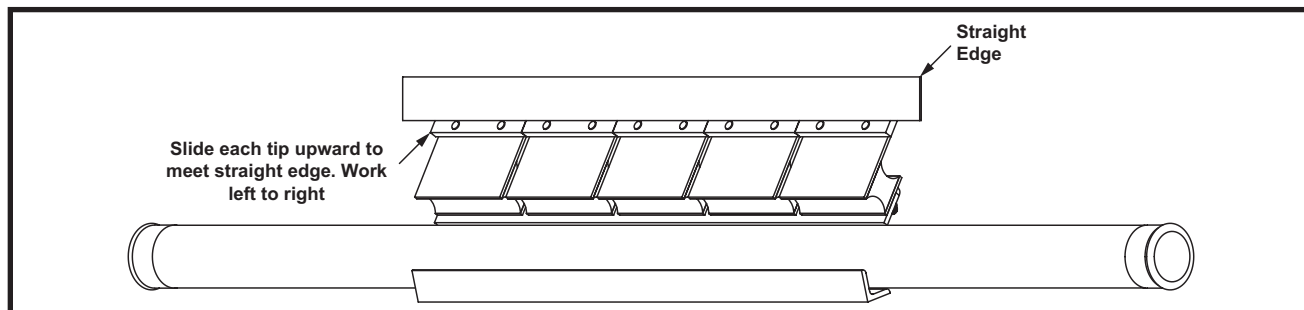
Martin® P2 Secondary Belt Cleaner HD Tip Alignment
